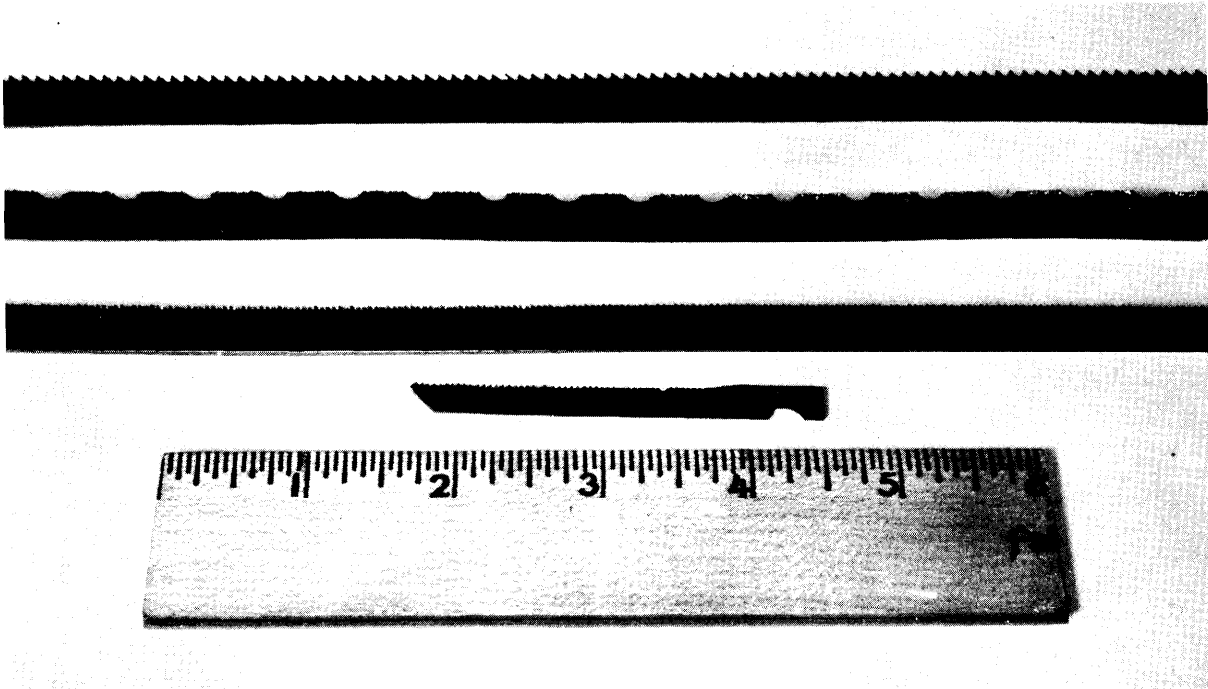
SAWS USED IN THE POWER JIG SAW
